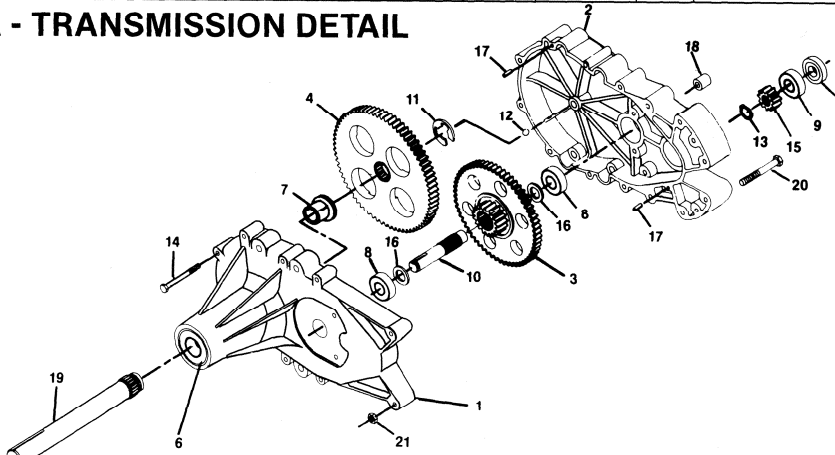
A - DETAIL PARTS LIST FOR 166204
